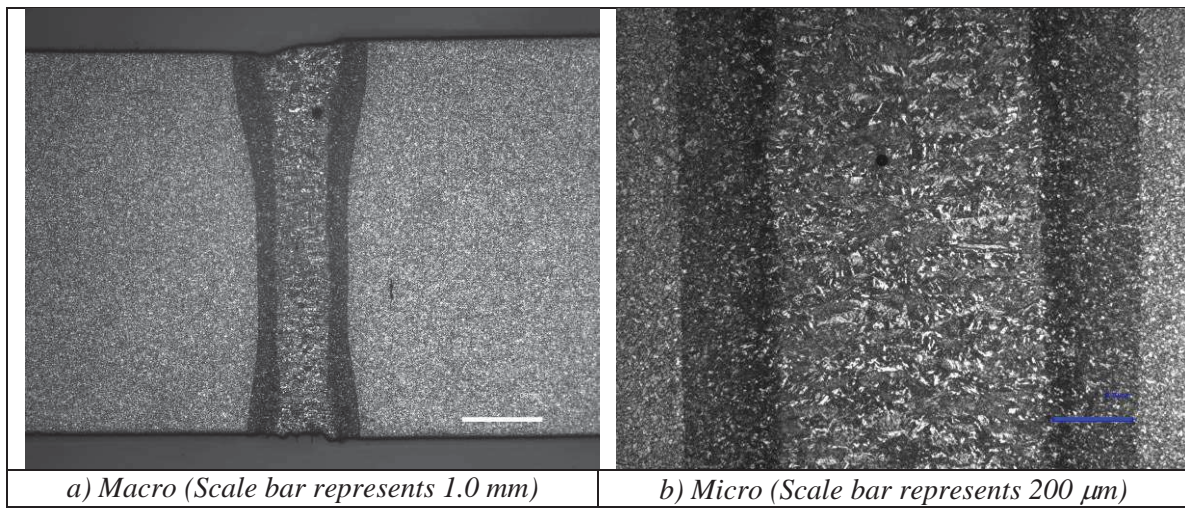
Welding condition of 5 kW and 66.7 mm/s (75 J/mm)
